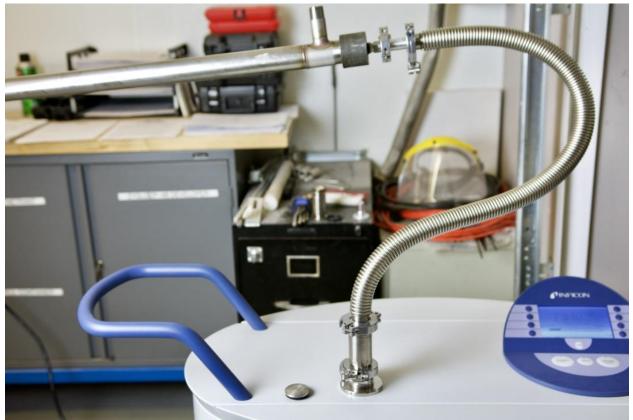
Mass spectrometer machine pulling vacuum on chamber containing hose assembly.
